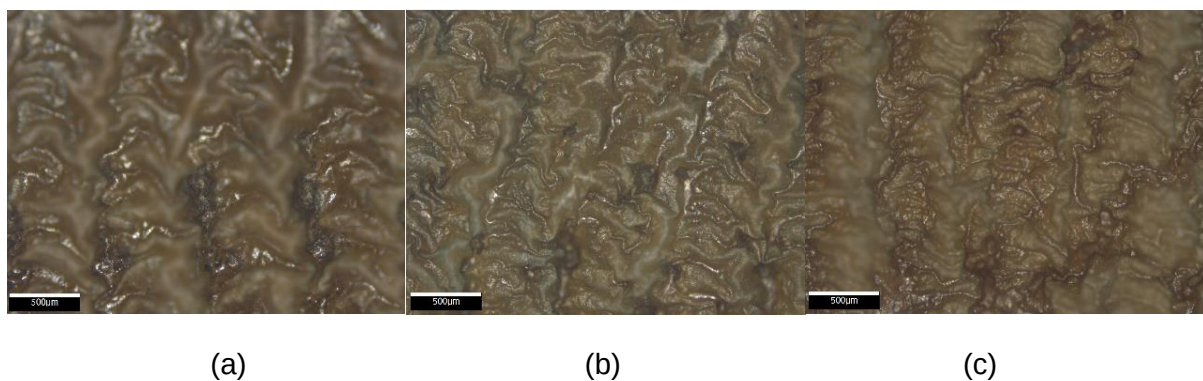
Ti64 workpiece surface morphology under LS, a) 650 °C; b) 850 °C; c) 1050 °C.
